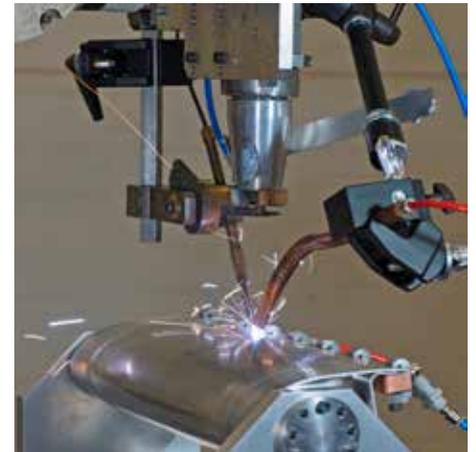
VIEWS aluminium laser welding (courtesy GKN).
